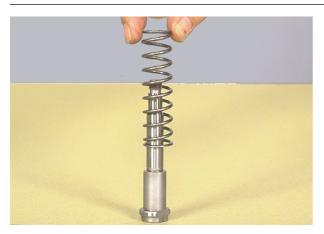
Install inching return spring.Refer to the cleaning and inspection pages.
